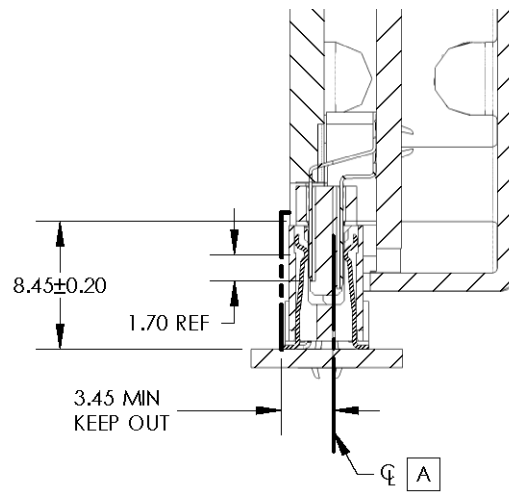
Connector Plug Mechanical Drawing – Section D-D (Tongue cross section)
